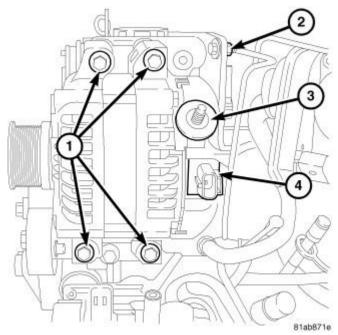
GENERATOR Courtesy of CHRYSLER LLC
